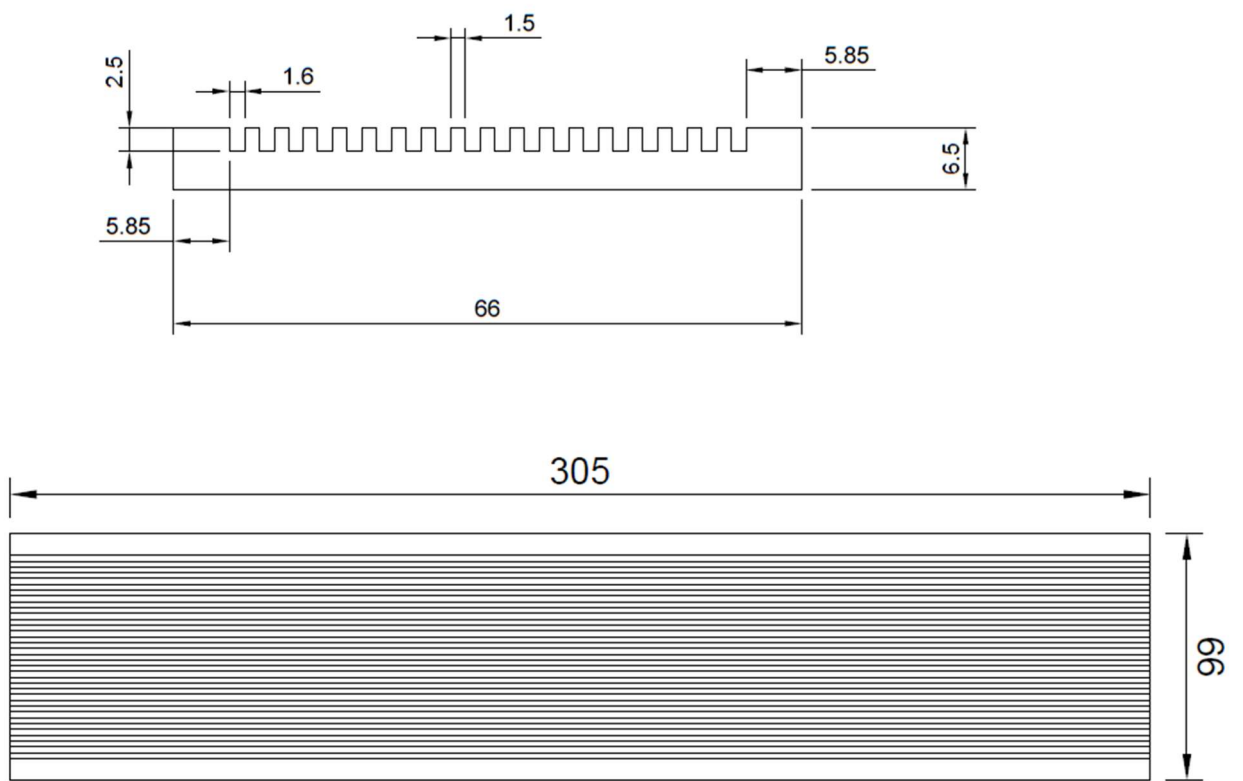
CAD drawing of aluminium base plate for 1.5 mm channel width
